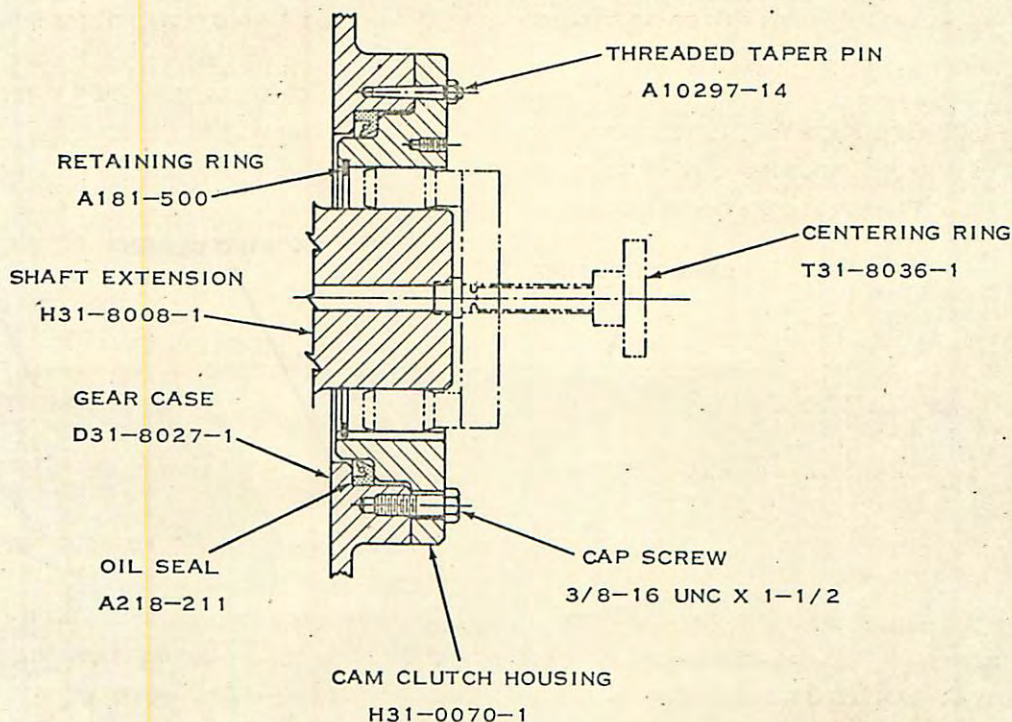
CENTERING CAM CLUTCH HOUSING
